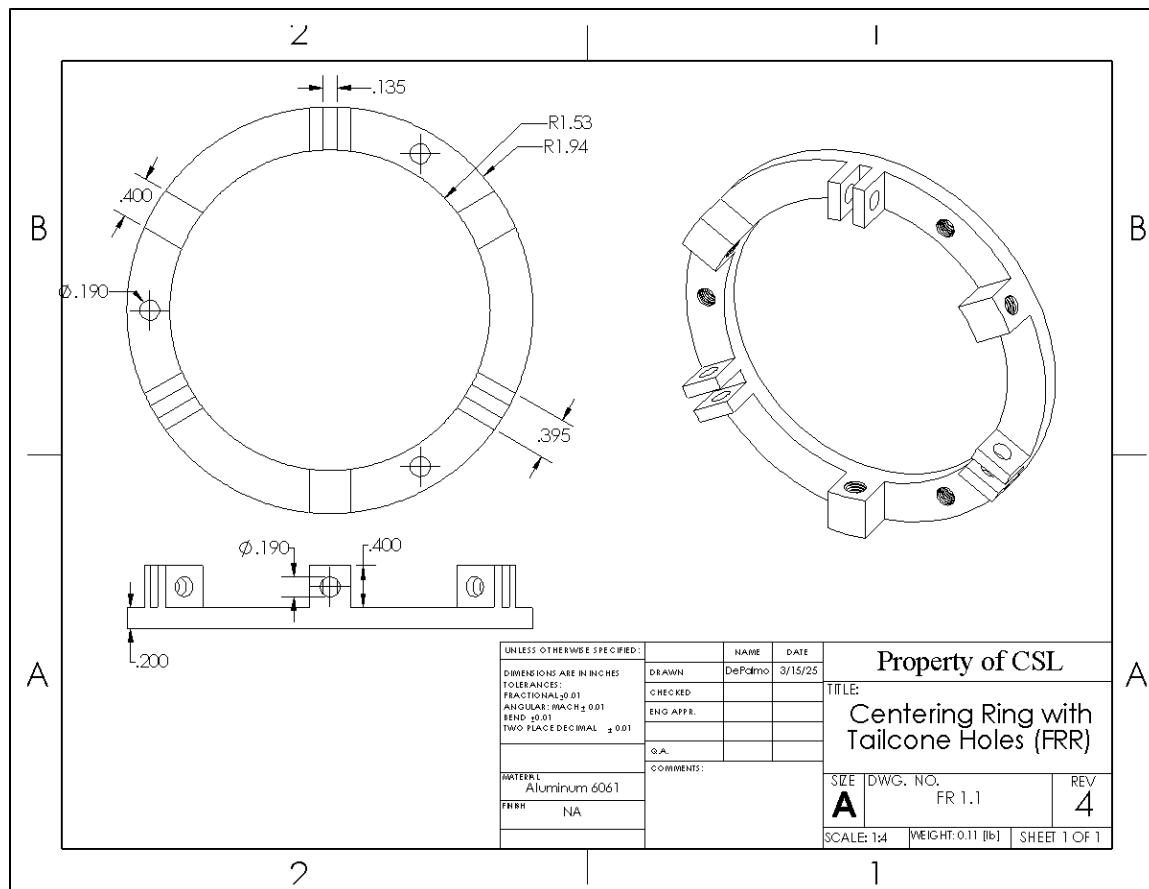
Dimensioned SolidWorks drawing of centering rings with tapped tail cone holes.
